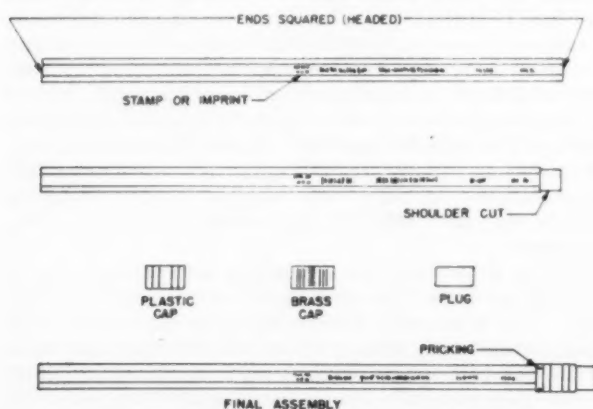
PENCIL DECORATION AND ASSEMBLY
